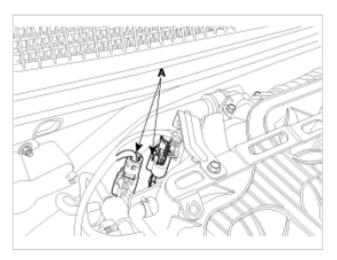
Identifying Ignition Coil Connect Courtesy of HYUNDAI MOTOR CO.
